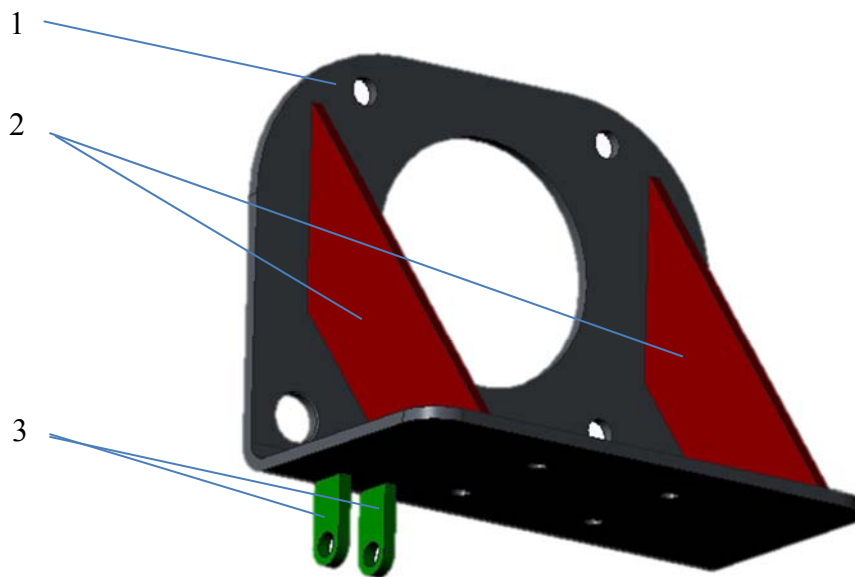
The actuator housing design, 1 – actuator body, 2 – supporting rib, 3 – attachment point for linear actuator
